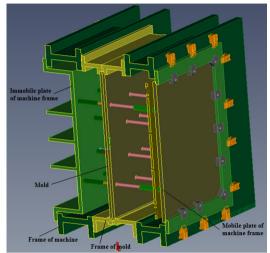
Scheme of mold construction for manufacturing of EPS products
